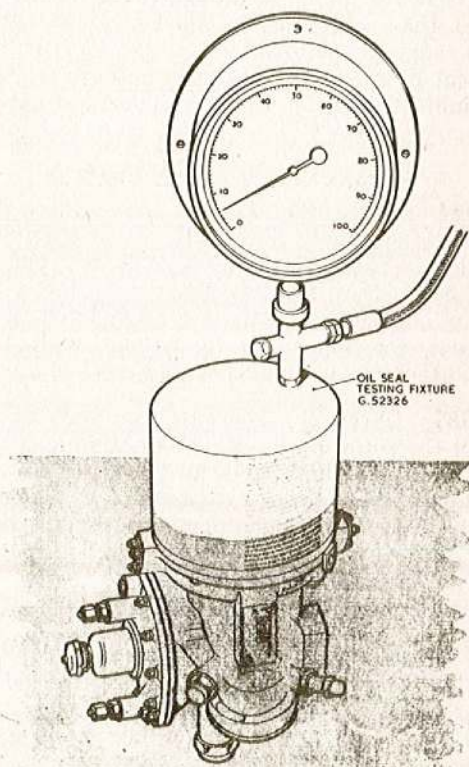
Pump, with oil seal testing fixture G.52326 fitted, submerged in kerosine for leak test
